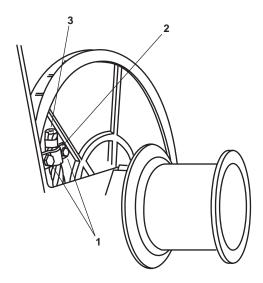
Cable Clamp Securing Bitter End of Wire Rope
